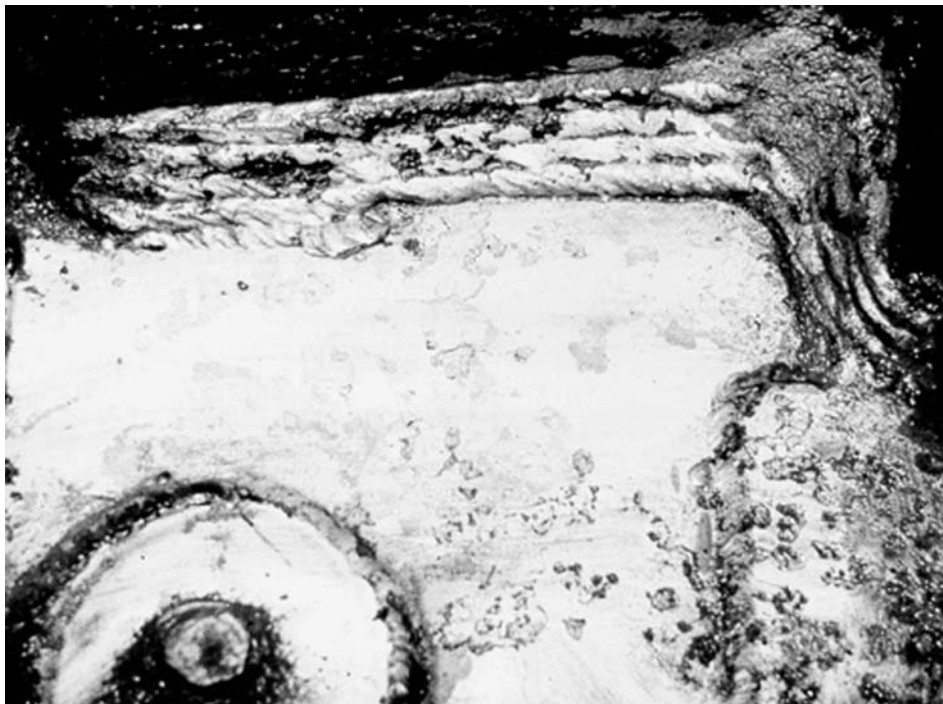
Alloy 686 weldment after 6 month exposure in FGD Bypass Duct
